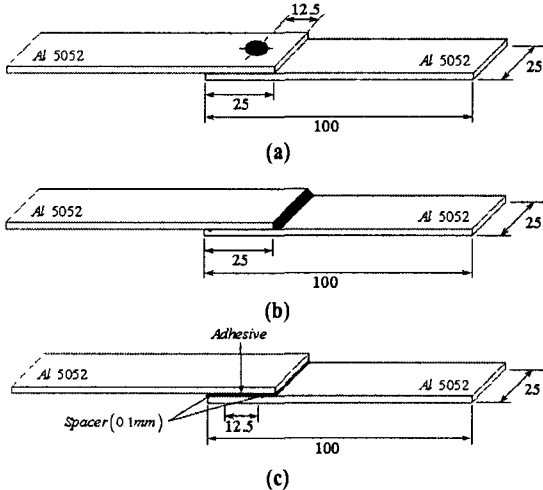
Schematic of aluminum joining; (a) Spot welding, (b) MIG welding, (c) Adhesive bonding
